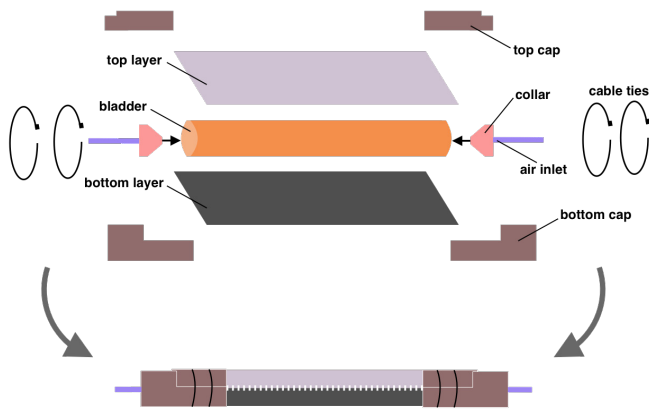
Exploded view (top) and final actuator (bottom) illustrating the universal fabrication technique. Two fabric layers encase an extensible bladder. The bladder has collars with air inlets tubes inserted on both ends. The fabrics are sewing together (not shown) and the top and bottom end-caps unify the individual components. As a last step cable ties are used to secure the end-caps (not shown).
